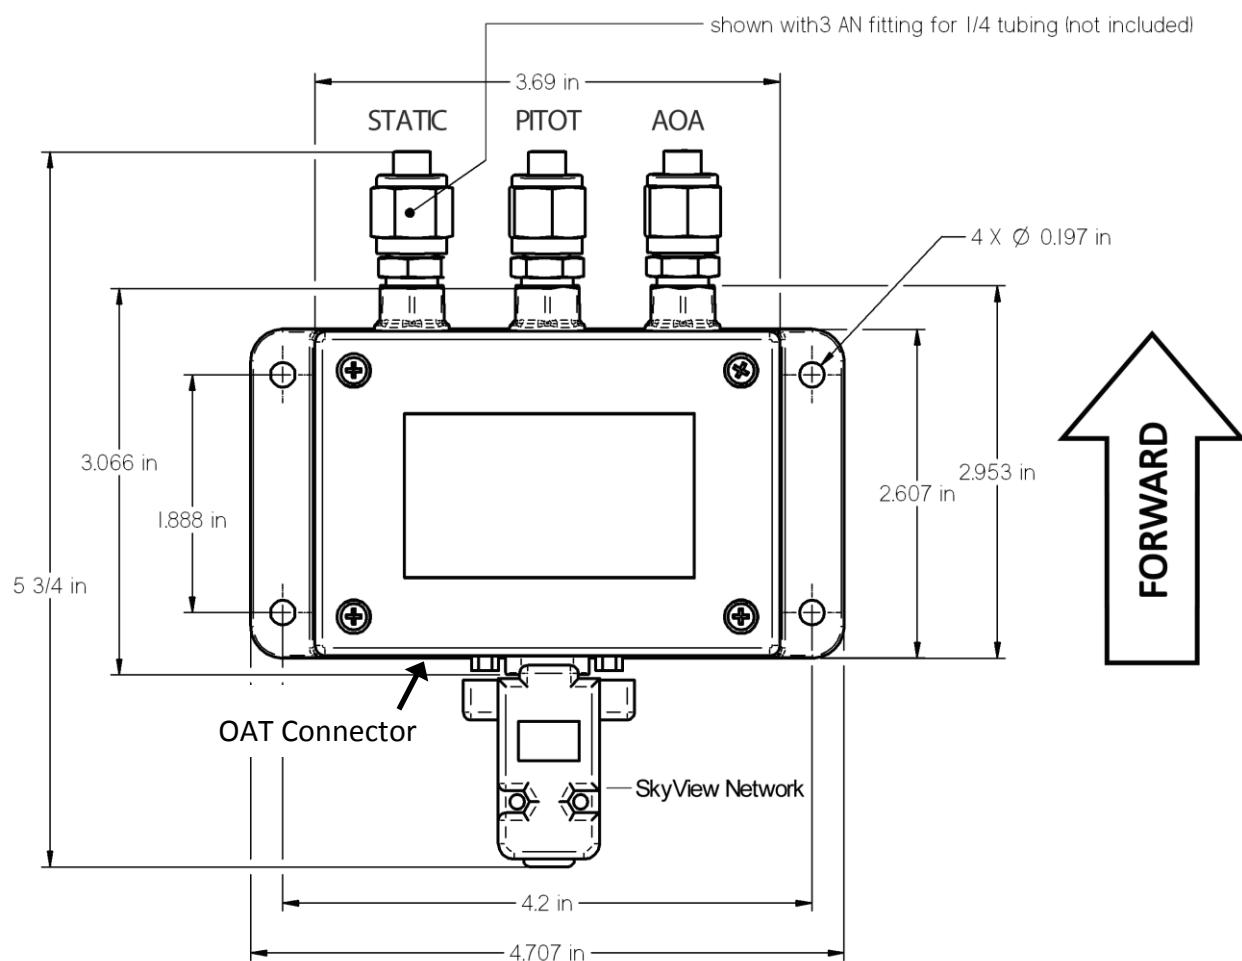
SV-ADAHRS-20X Mounting Dimensions with Electronic and Pneumatic Connections
